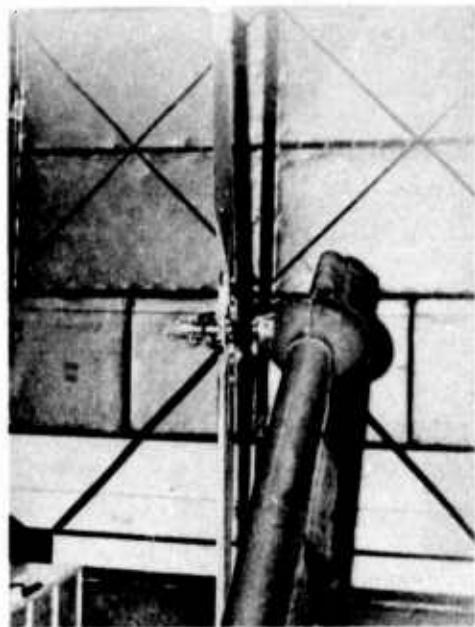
Front View, 90-Degree Gearbox, YAH-1S Helicopter.
